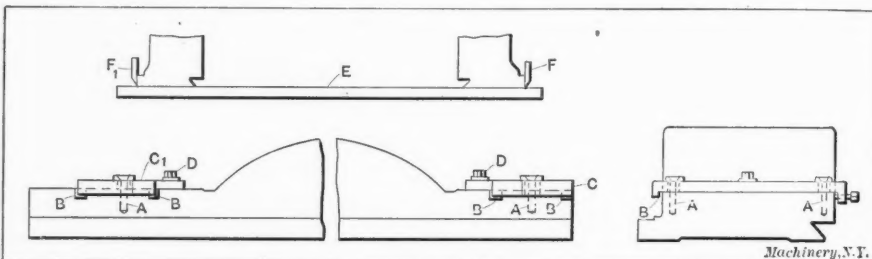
Jigs for Drilling Stud Holes in Back of Cross-rail. Setting of Jig *C*, Endwise, is accomplished by transferring Measurement from Housings by Means of Wooden Straightedge *E
